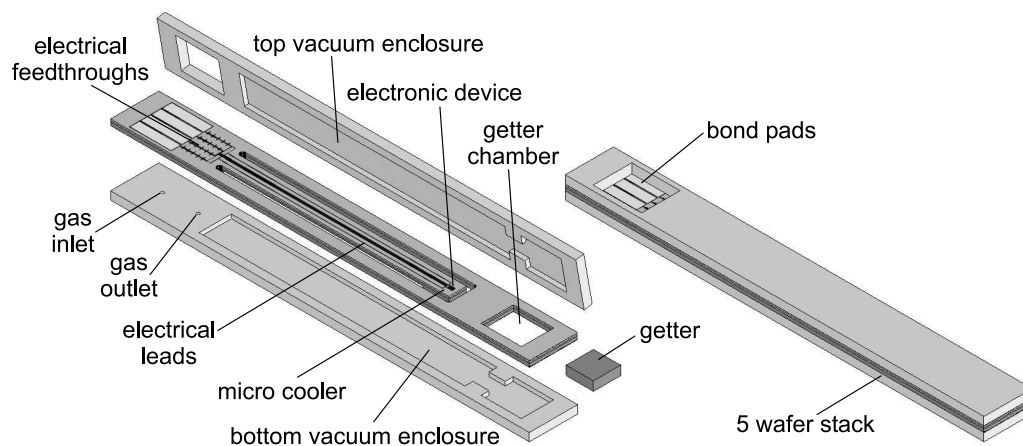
3 dimensional schematic of the integrated device. Left: exploded view, right: assembly
